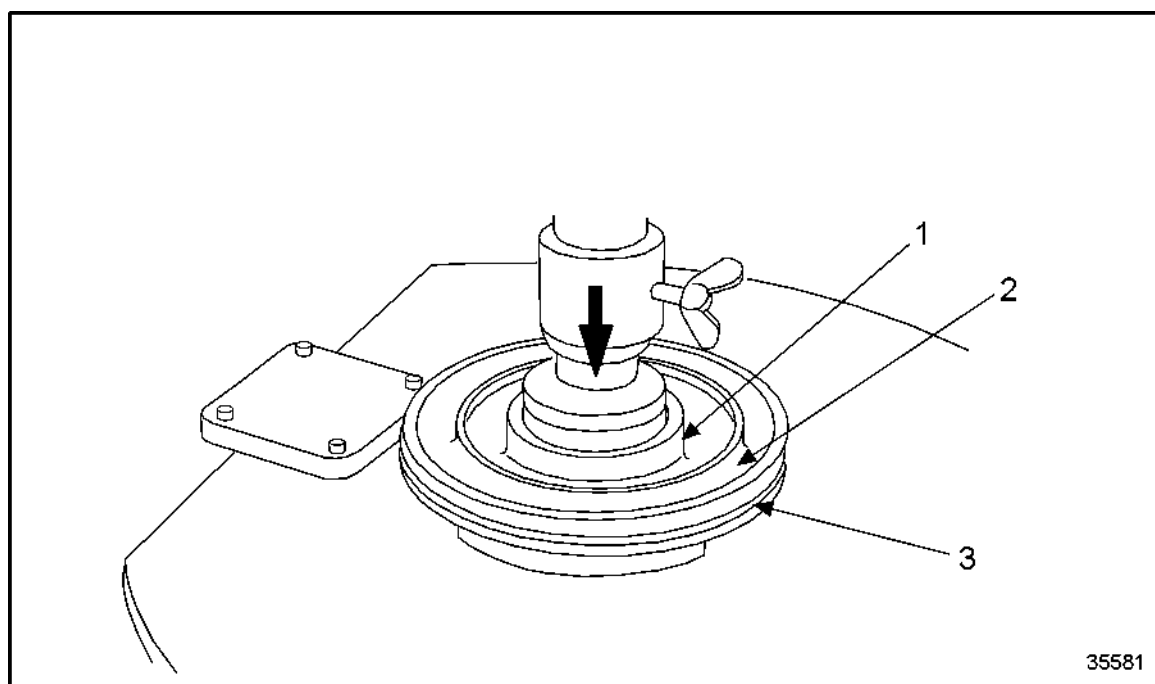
Coating Outer Surface of Rotary Seal with Sealant
